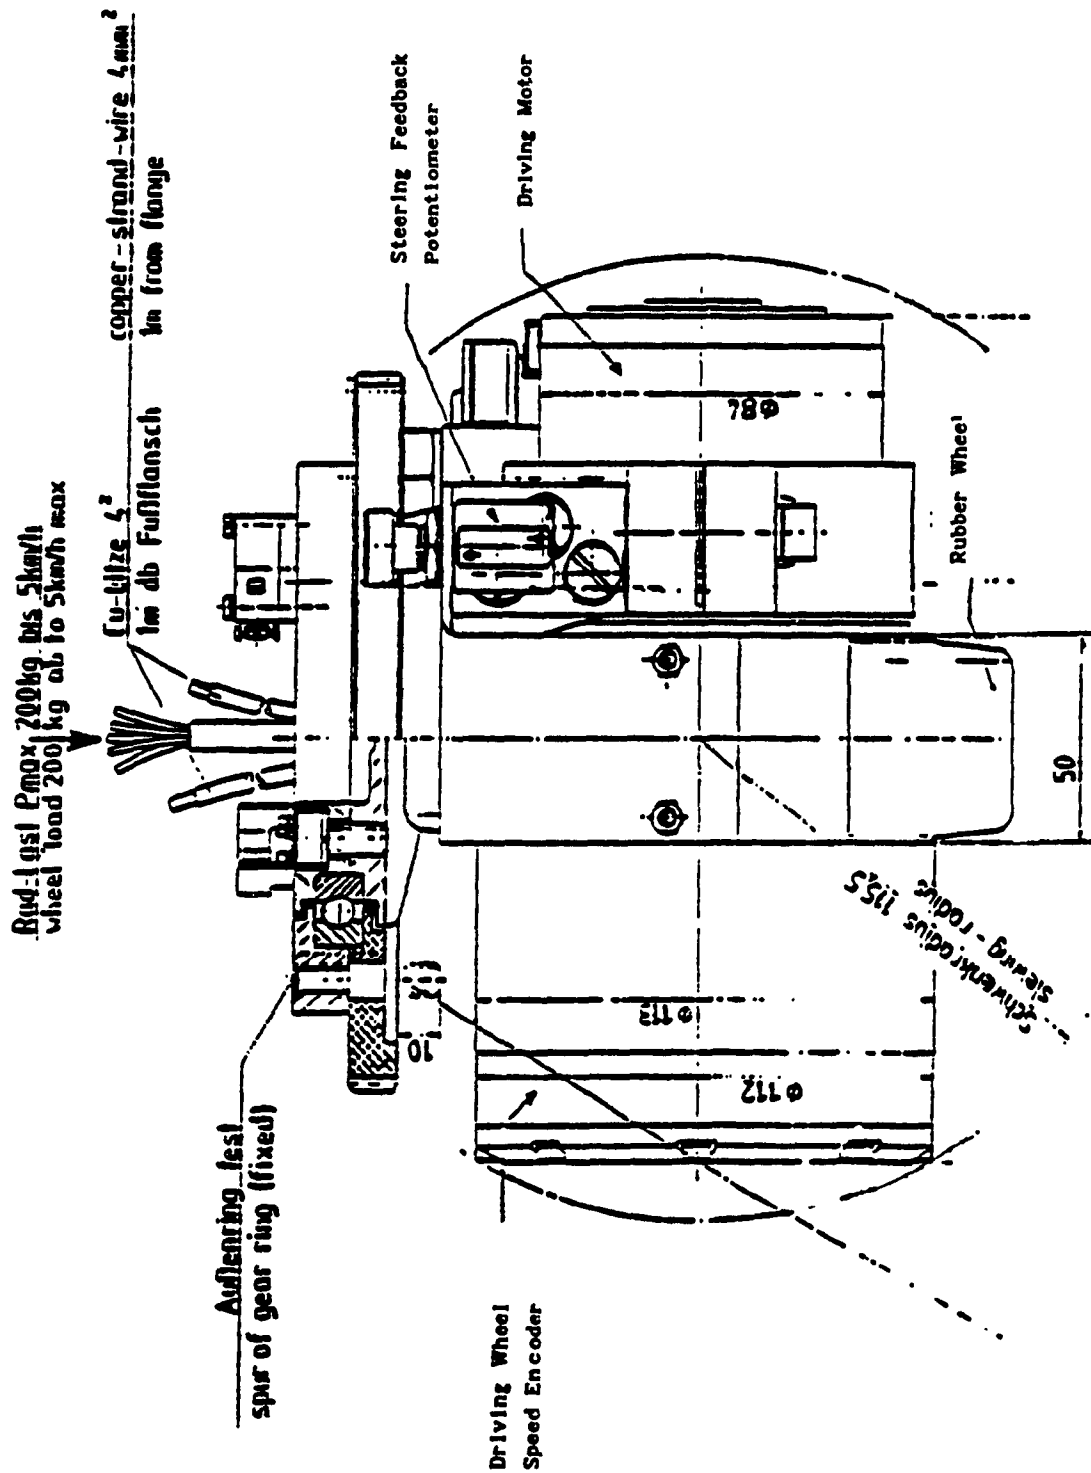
Motor-in-Wheel-Drive Unit (Front Elevation)
